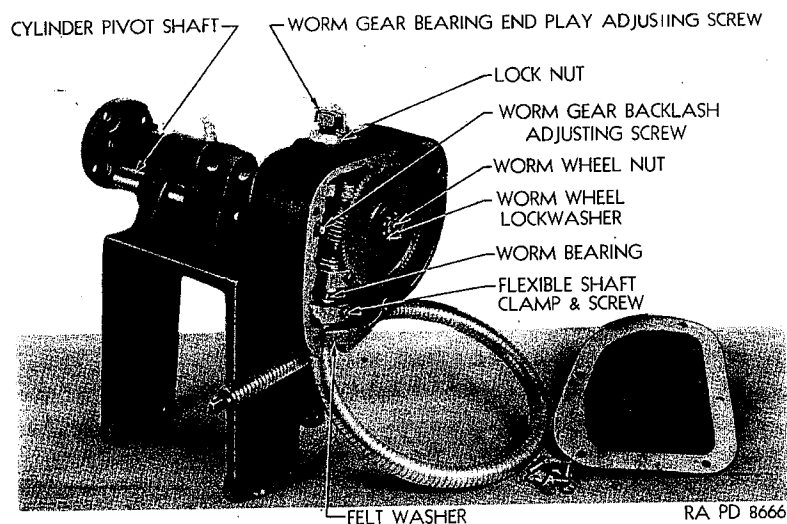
Mounting Bracket Assembly, Gyro-Stabilizer
